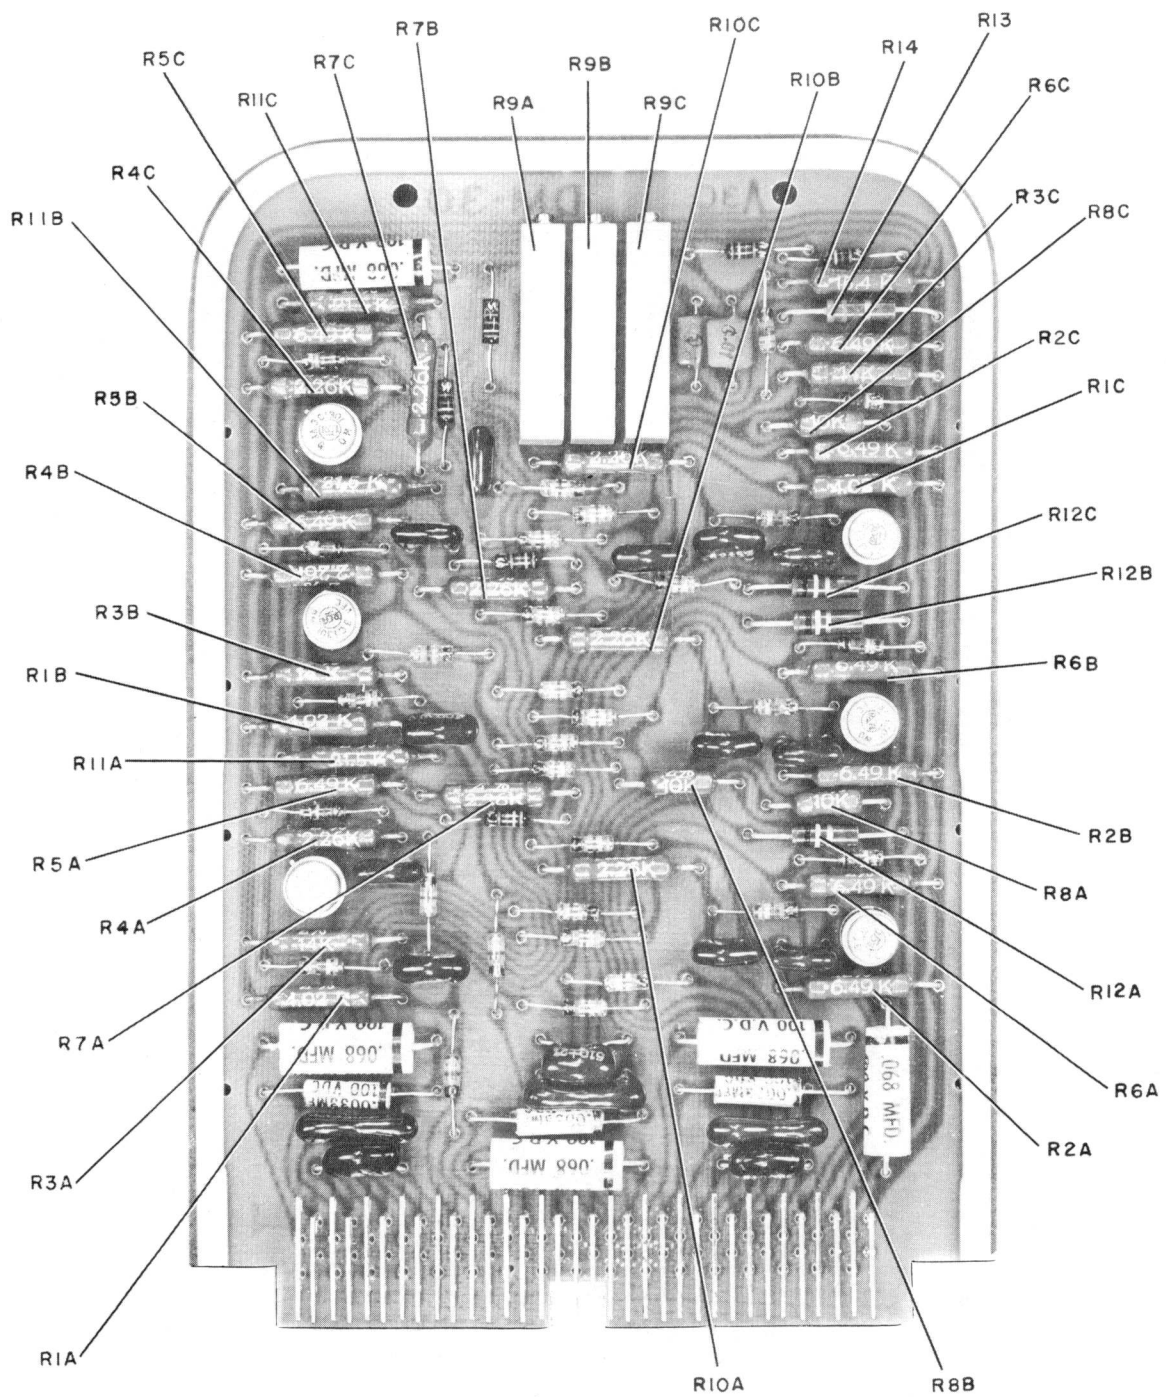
Adjustable Delay Multivibrator PAC, Model DM-30A, Parts Location (Resistors)
